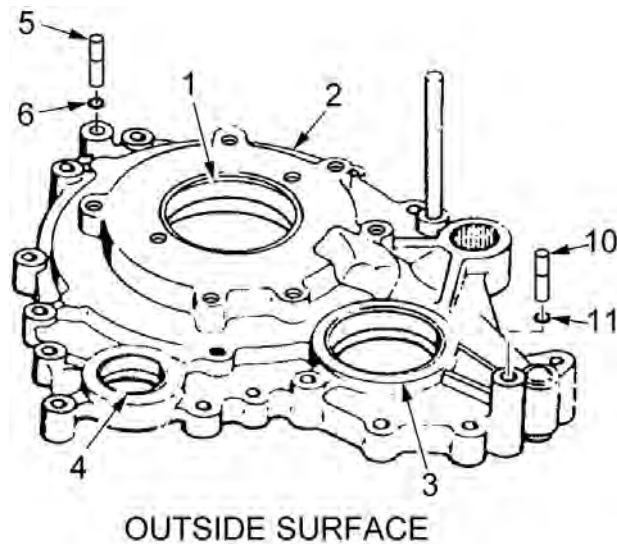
Retaining Rings and Pins Installation, Heat Application.
